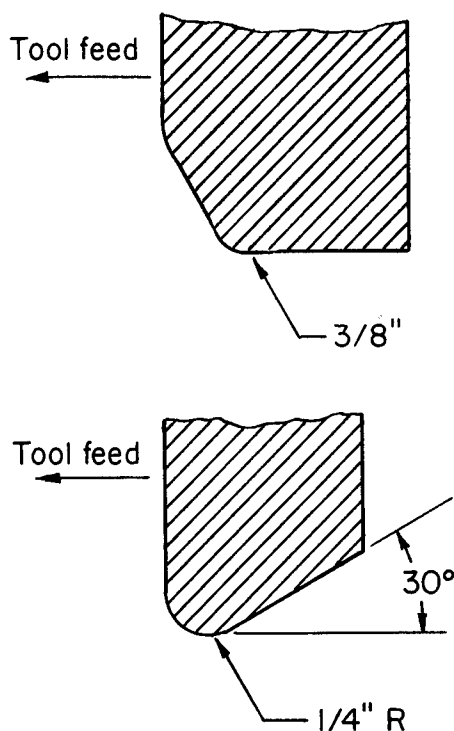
Shear-forming tools for cold-forming maraging steels. These tools are suitable for materials under $\frac{3}{16}$ inch thick (ref. 106).
